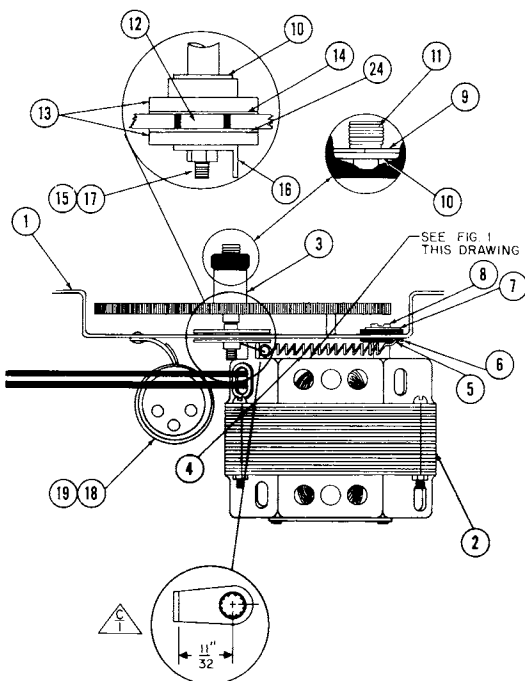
Assembly, Stepper Modification, WW-3267-23B (Part of Assembly, Figure 13).
